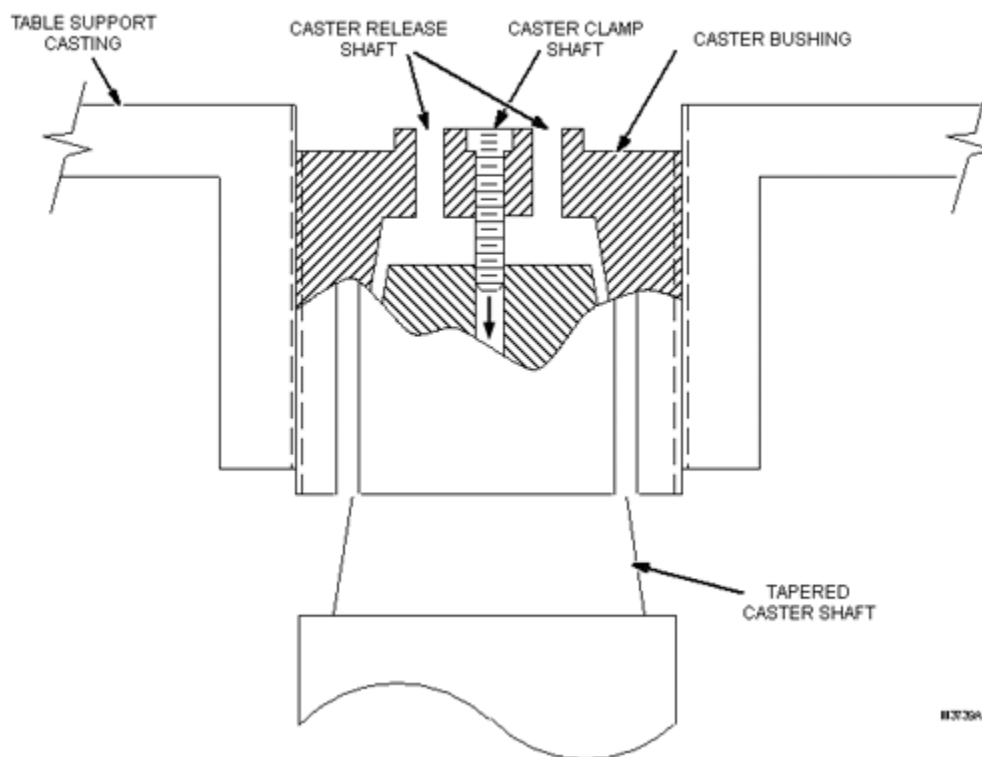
Caster Bushing and Tapered Caster Shaft
